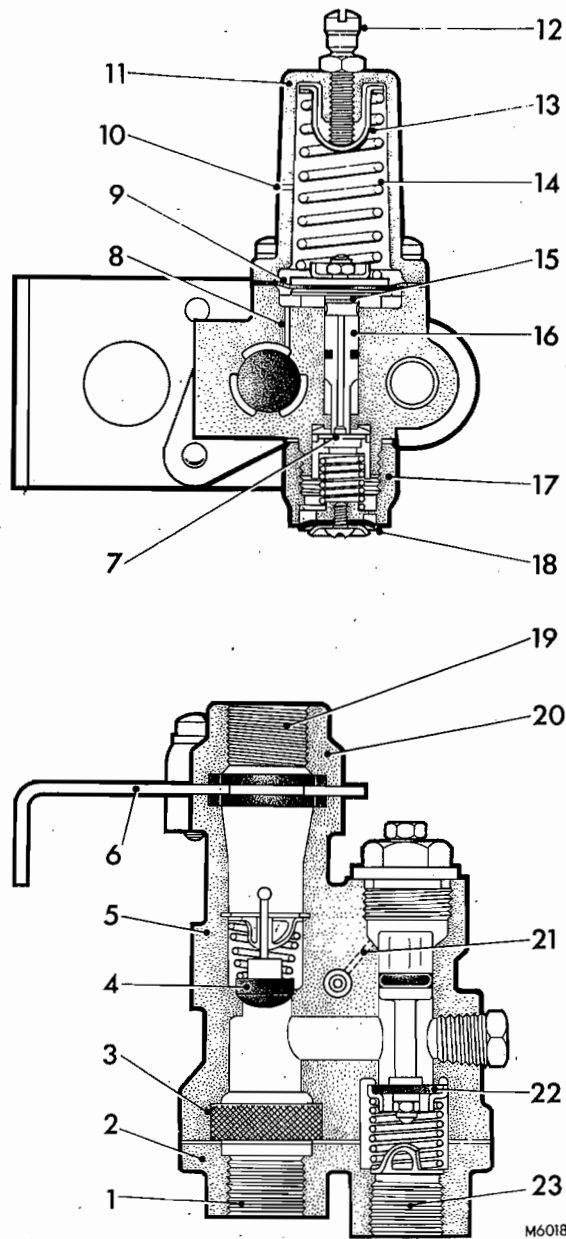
SECTIONS THROUGH A TYPICAL VALVE
